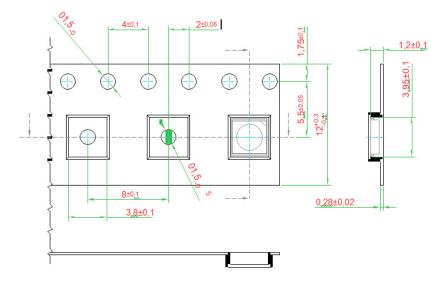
Pocket Tape dimensions for LUXEON 3535L Color Line.
